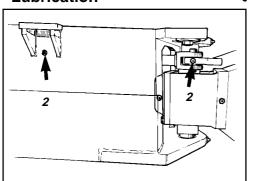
Steering cylinders, right side 2. Lubricating nipples, cylinder brackets
